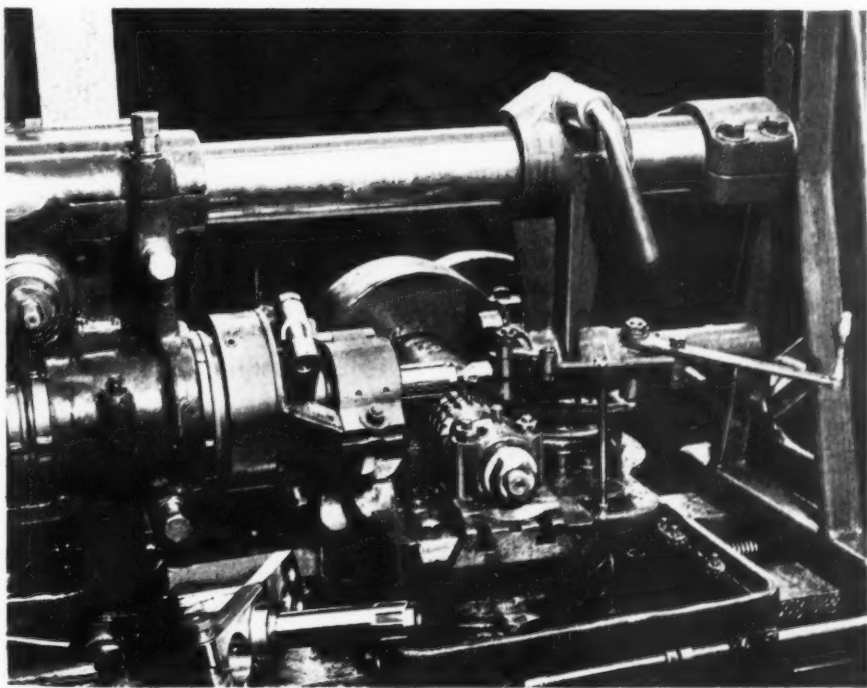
Hobbing Square Splines on the Rear Section of a Crankshaft for Tank Engines
